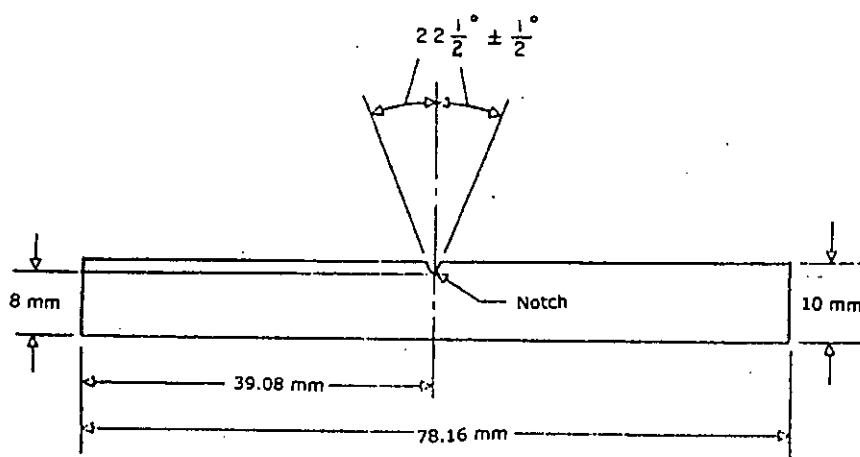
Dimensions of simple beam, charpy type, impact test specimen
